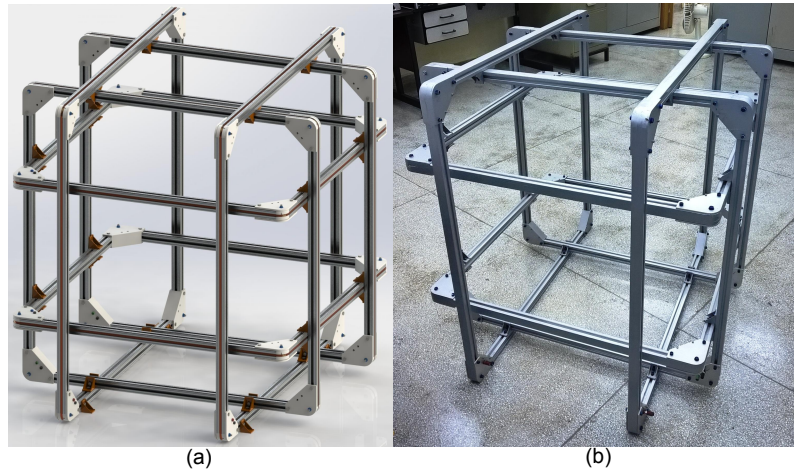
Three-axial Helmholtz CAD coil project (a) and final assembly (b). See [25] for further details of the design.
